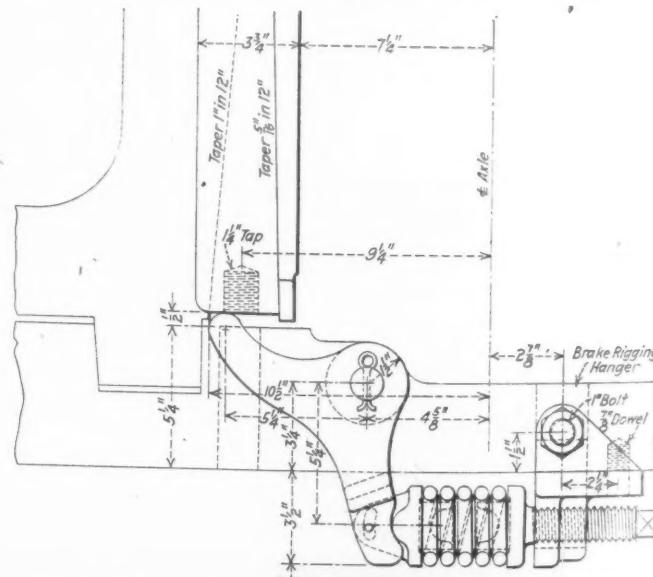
Bellcrank Lever and Horizontal Adjusting Spring Give Ample Rail Clearance
